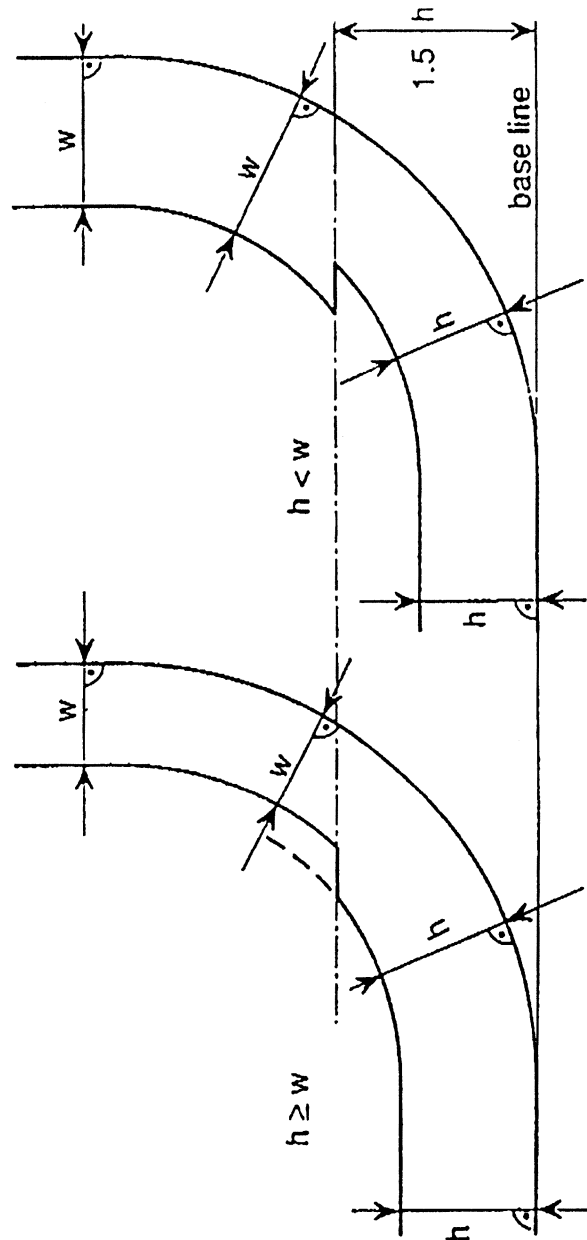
(c) Minimum Double Hull Dimensions
